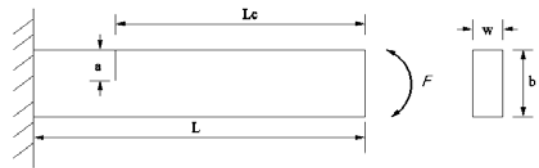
The geometry of a cantilevered beam having a fatigue surface crack.
